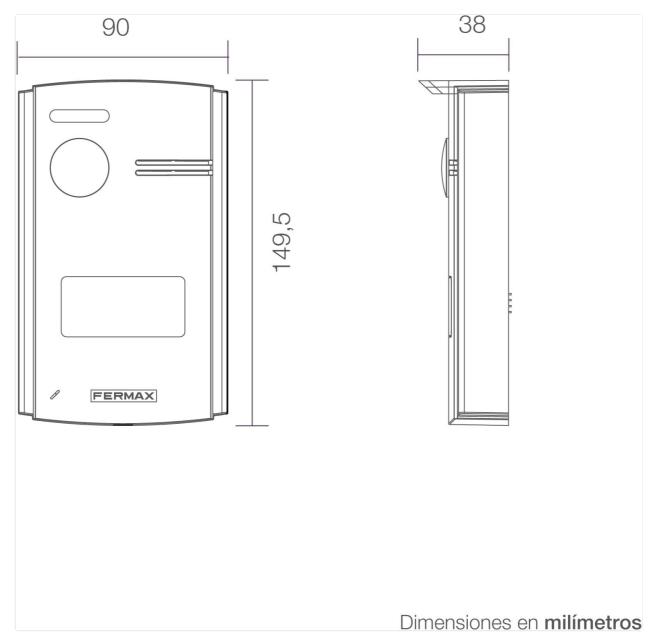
Dimensions of the Fermax outdoor panel (90mm width, 149.5mm height, 38mm depth).
